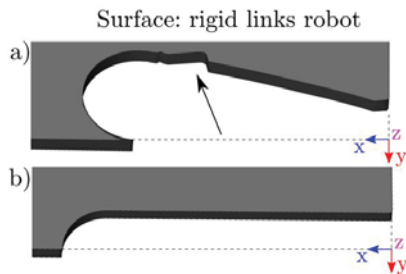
Machined surface: robot with rigid links - a) without spring (unstable case) - b) with spring (stable case)
